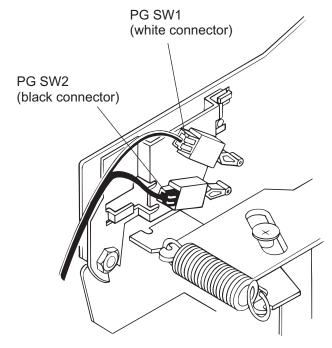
Connecting the PG Sensors to the PG Sensor Holder
